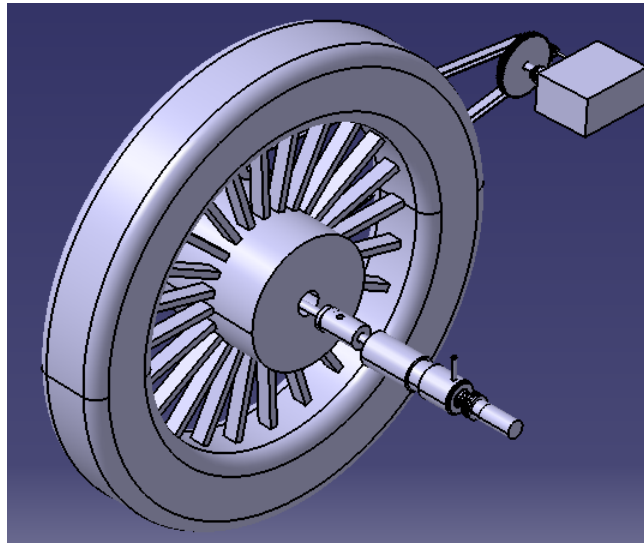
COMPLETE ASSEMBLY FRONT VIEW
